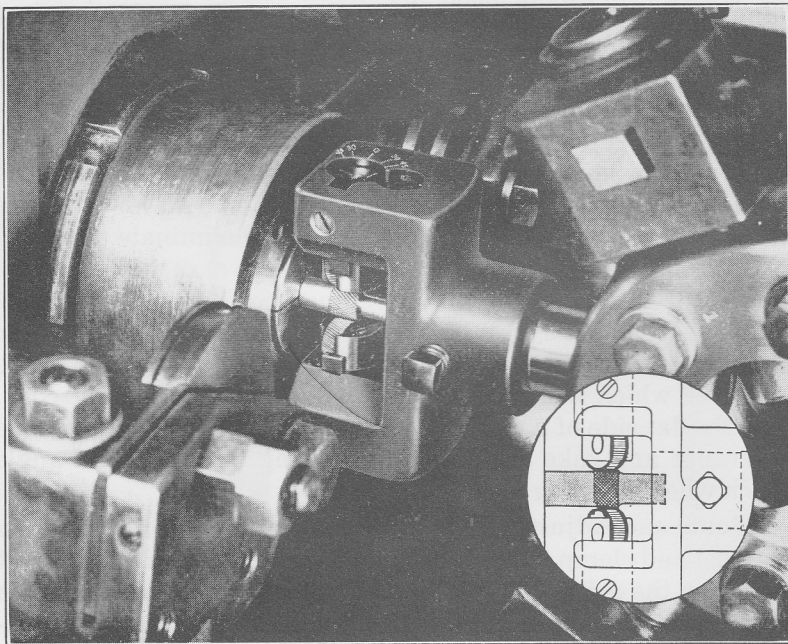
Knurl Holder is adjustable to produce different types of knurling
